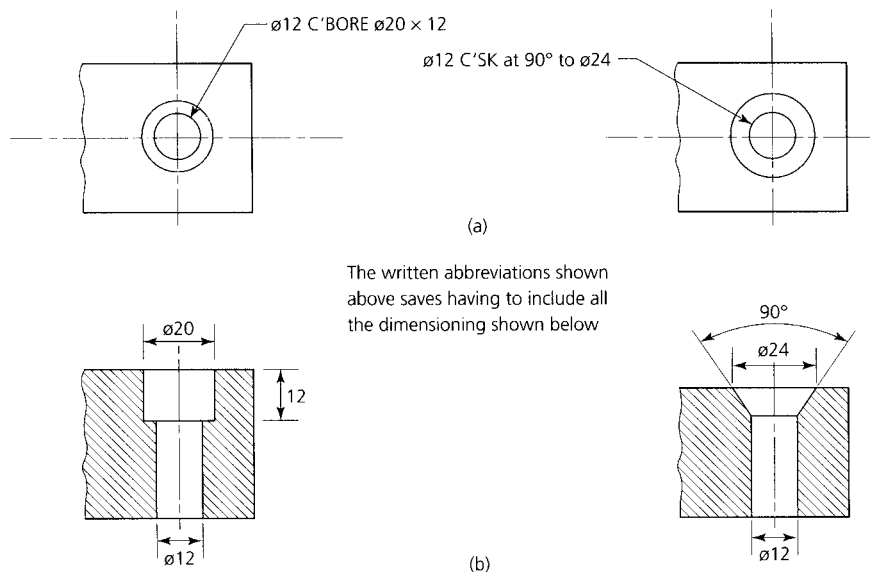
Examples of the use of standard abbreviations: (a) counterbored hole; (b) countersunk hole
